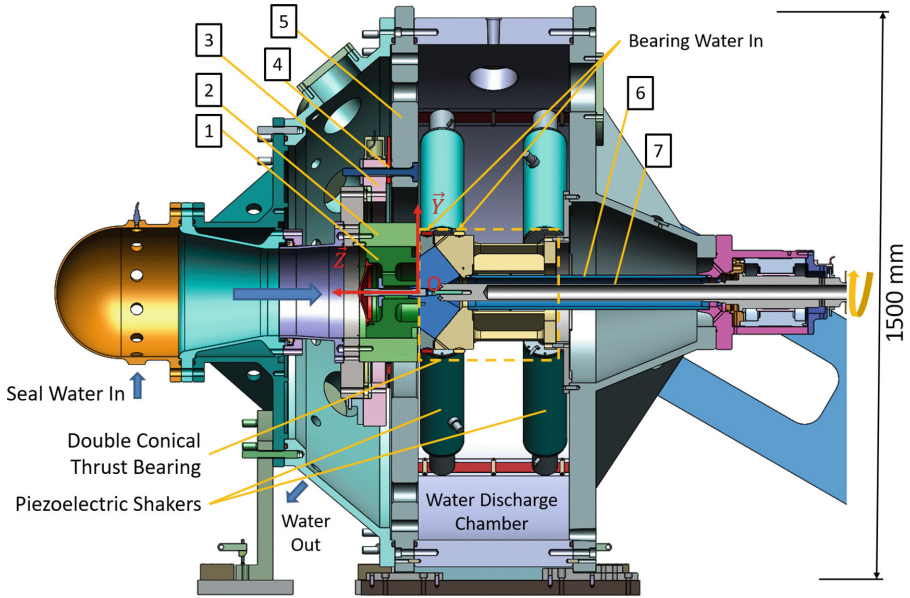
Cross sectional view of the test cell - annular seal configuration
